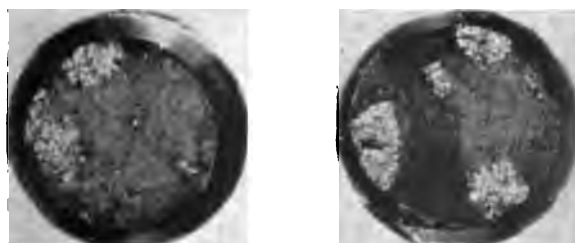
FRACTURES TEST-BAR 948D. SAME FORGING AS FIG. 23 AFTER ADDITIONAL
